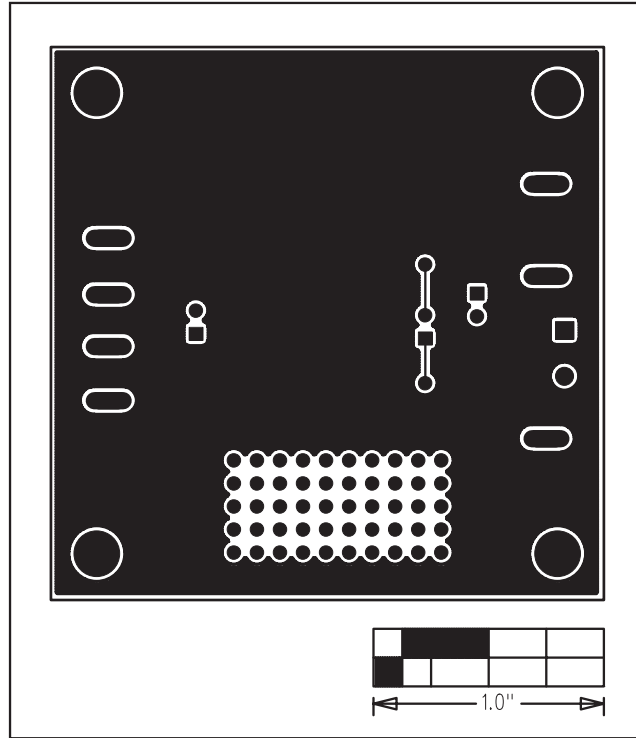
MAX13485E EV Kit PCB Layout—Solder Side
